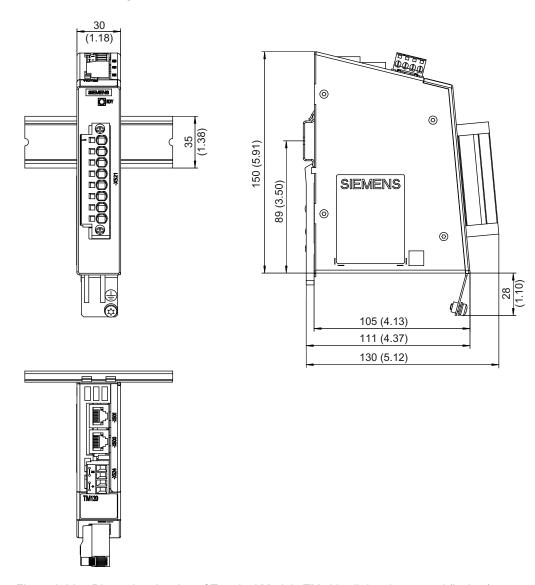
Dimension drawing of Terminal Module TM120, all data in mm and (inches)
